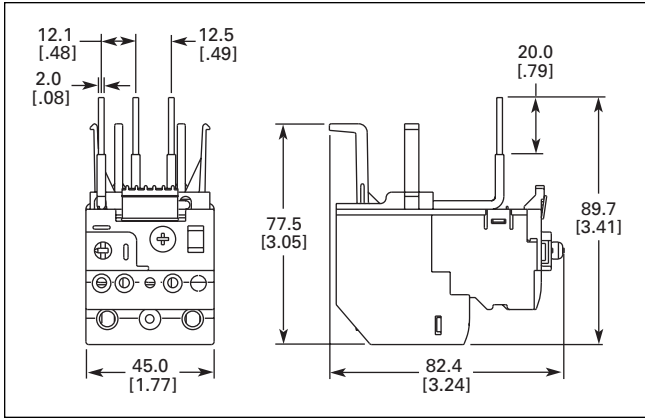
45 mm C396 (0.1 – 8A) Direct Connect to XT Frame C Contactor — Approximate Dimensions in mm [in]
